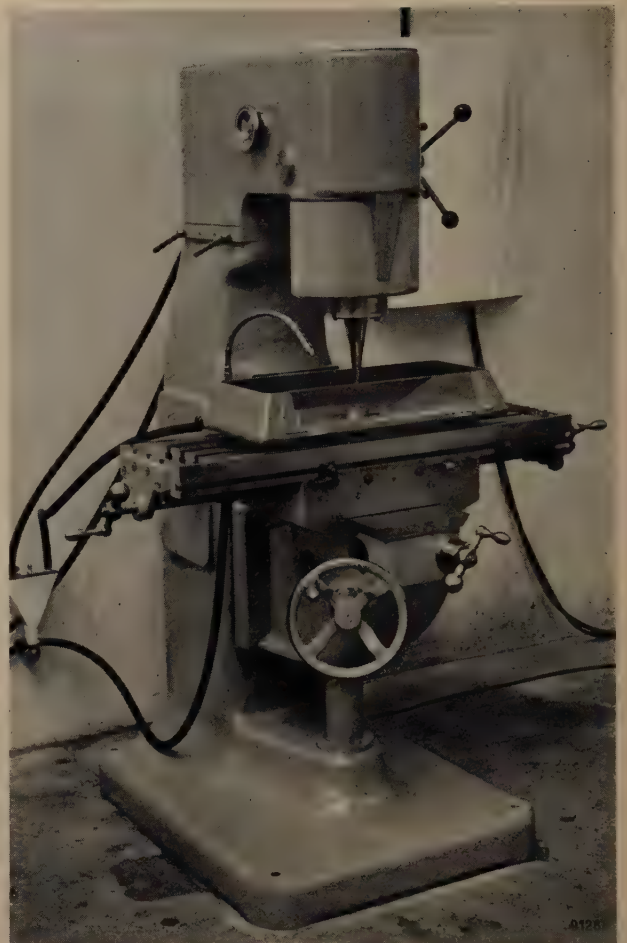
Mullard high-power drill mounted on a standard type of machine-tool base, with moveable work table.
